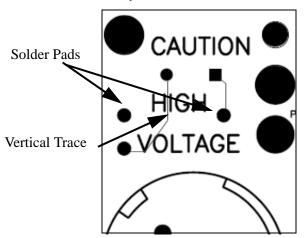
Tinned Jumper Wire Placement for Boards Rev H, J, K, L
